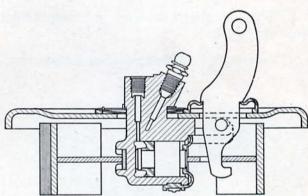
Sectioned view of rear brake cylinder showing attachment details and parking brake shoe lever
